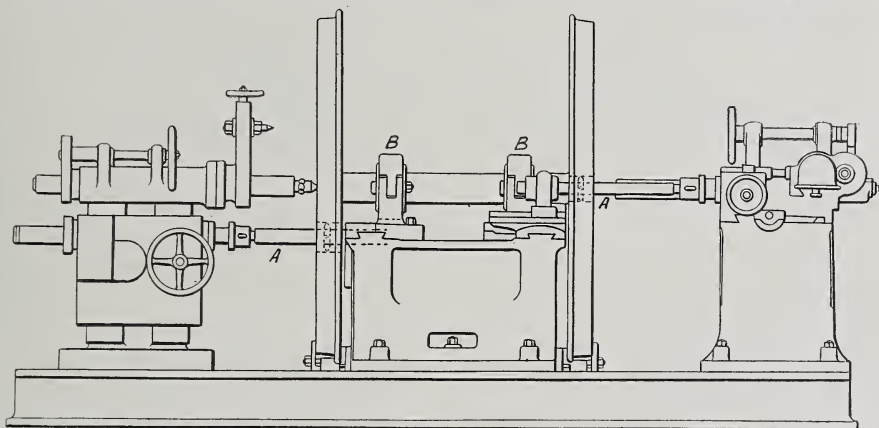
THE MACHINE SHOWN IN FIG. 3 ARRANGED FOR BORING CRANK-PIN HOLES SIMULTANEOUSLY
